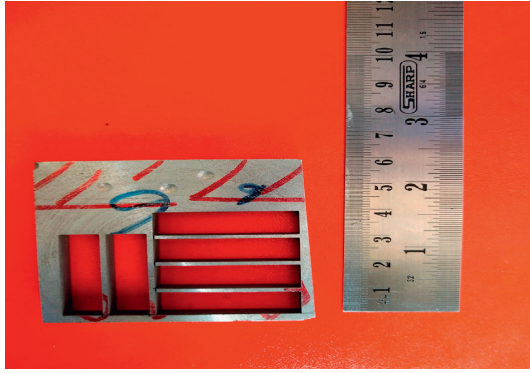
Wire electrical discharge machined AA5083-MoO₃ sample.
